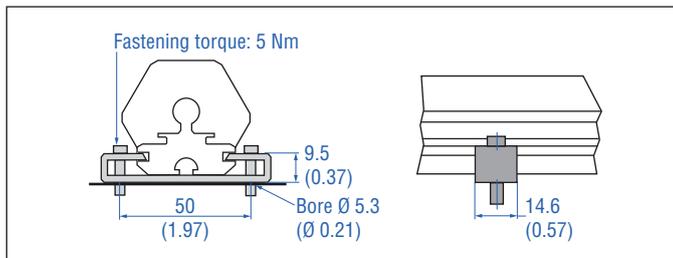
Mounting clamps (part no. 400 802) with cylinder screw M5×20
